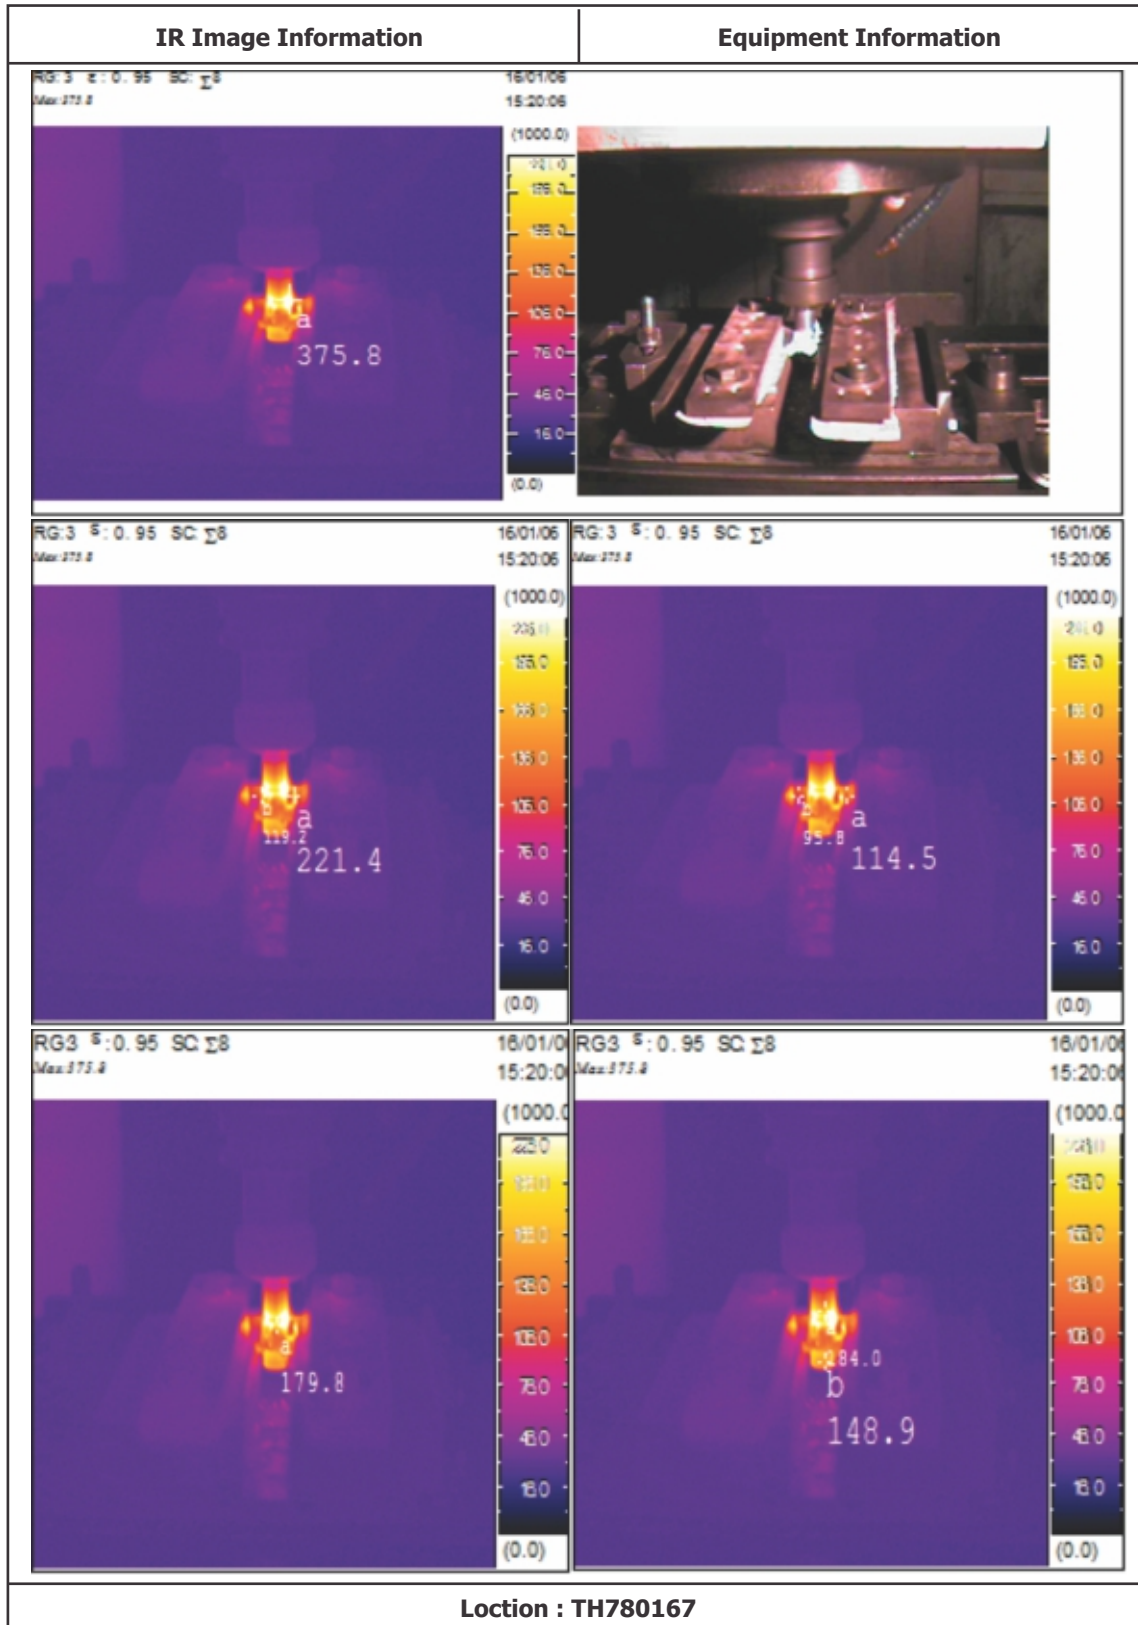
IR image for welding of AA6082 T6 alloy with spindle speed 800 rpm and traversing speed 24 mm/min, using BT2 (LHS= Advancing side, RHS=Retreating side)
